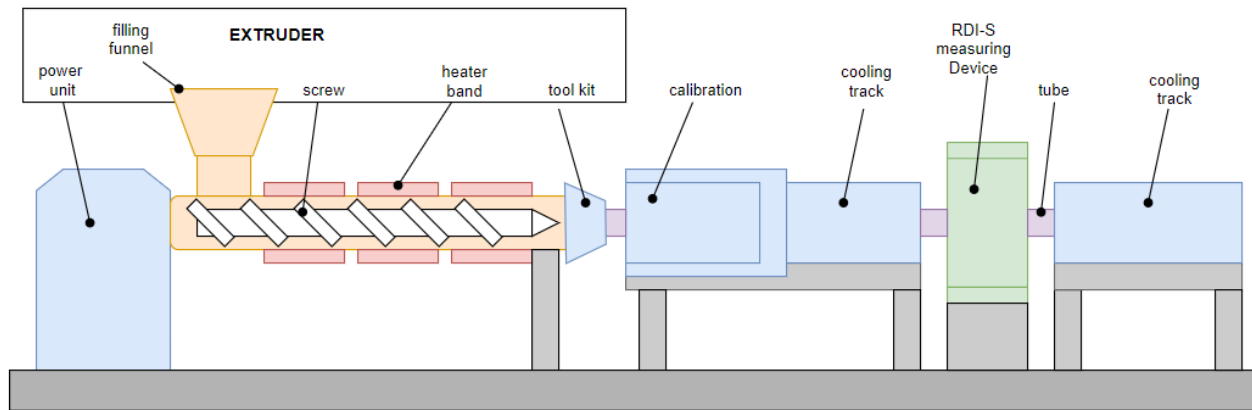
Cross section schematic of the first section of an extrusion line for pipe manufacturing
